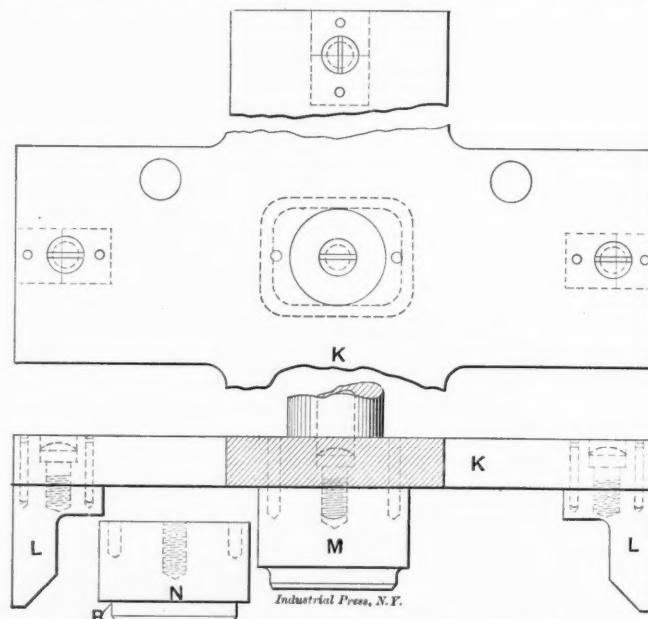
Plan and Sectional Views of Punch for Turning the Flange.
